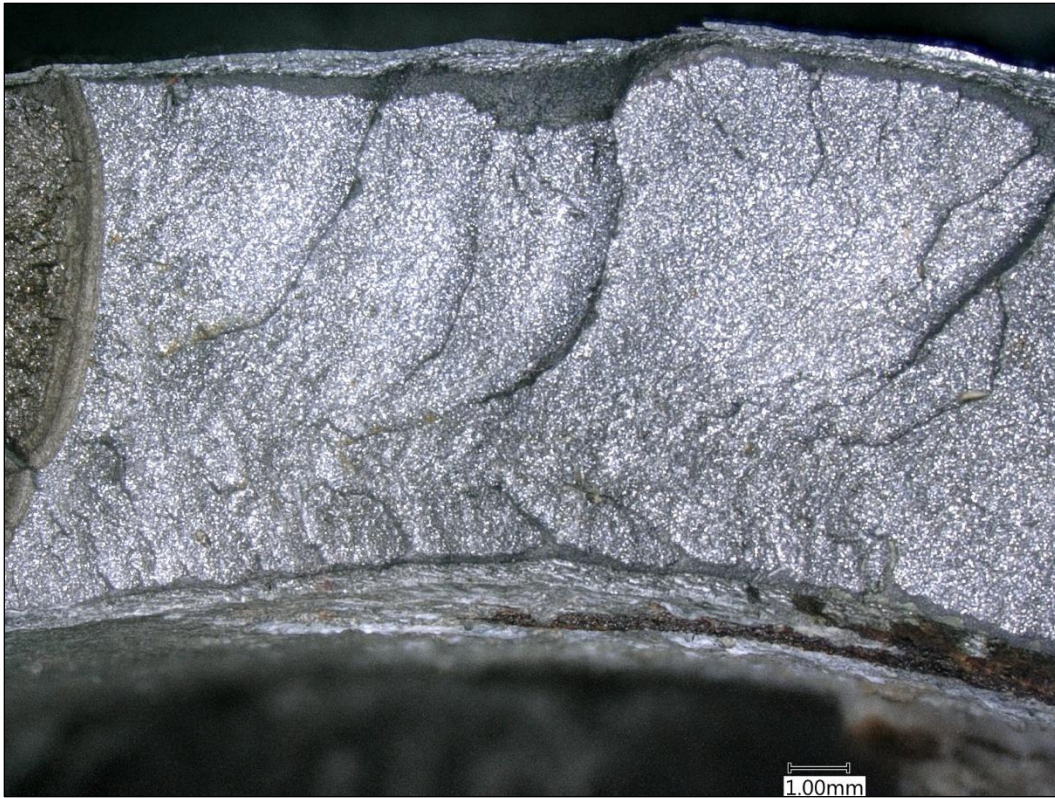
Reference 6 brittle fracture starting at tip of HAZ fatigue zone.
